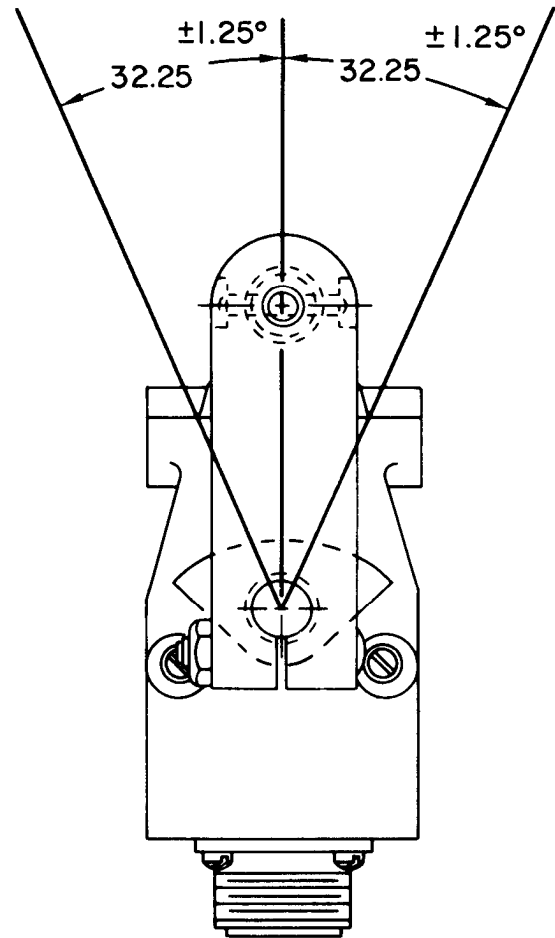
Stroke Setting Diagram, 32.25°, Part No. R460M15-3 and R460M15-11.
